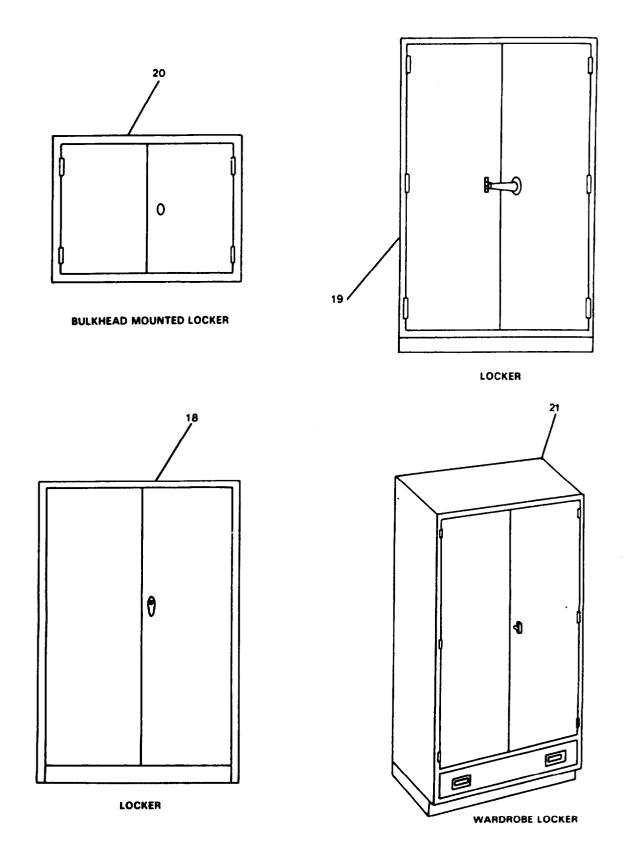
Furniture and Fixtures (Sheet 5 of 14).
